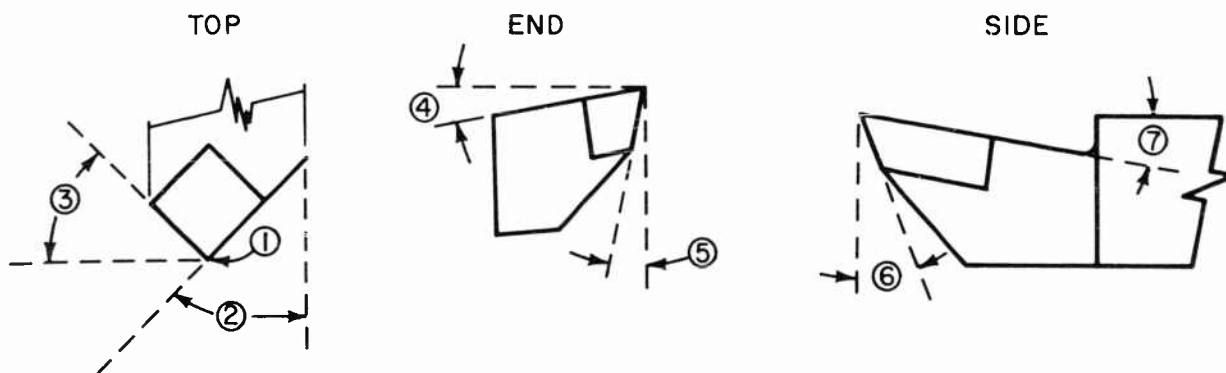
Lathe Tool Geometry, Brazed Carbide (Ref. Table 5-1)
